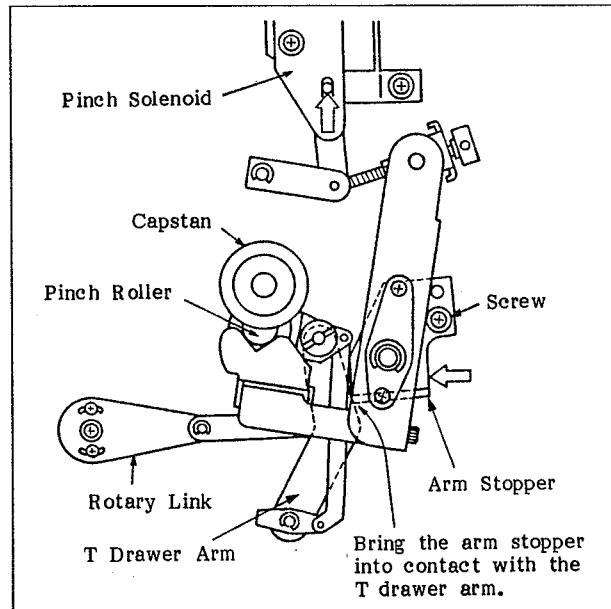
Adjustment of the Stop Position of the T Drawer Arm
